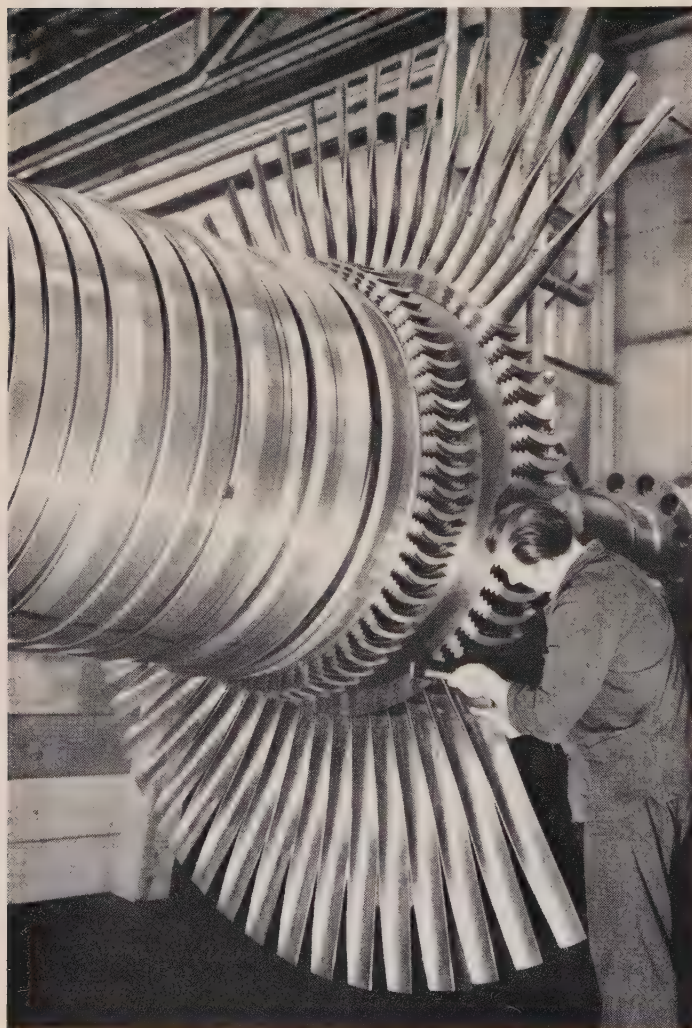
Fitting the blades to a large double-flow low-pressure rotor. The 600 and 750 mm long blades of the last two rows are fitted to the rotor by means of fir-cone-shaped attachments. This method of fixing ensures that the blades are able to withstand the powerful centrifugal forces which at a speed of 3,000 r.p.m. exert a force of 47,000 kg (103,600 lbs) per blade in the last but one row and 82,000 kg (180,800 lbs) per blade in the last row
